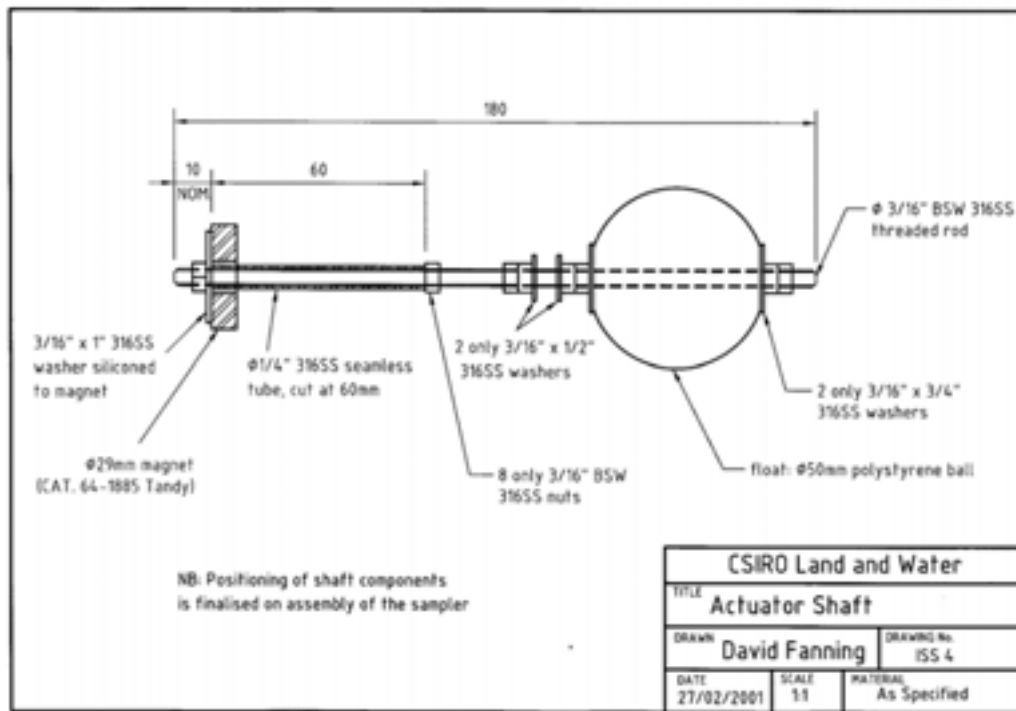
Drawing of actuator shaft component of bottle sampler (0.5 x scale)
